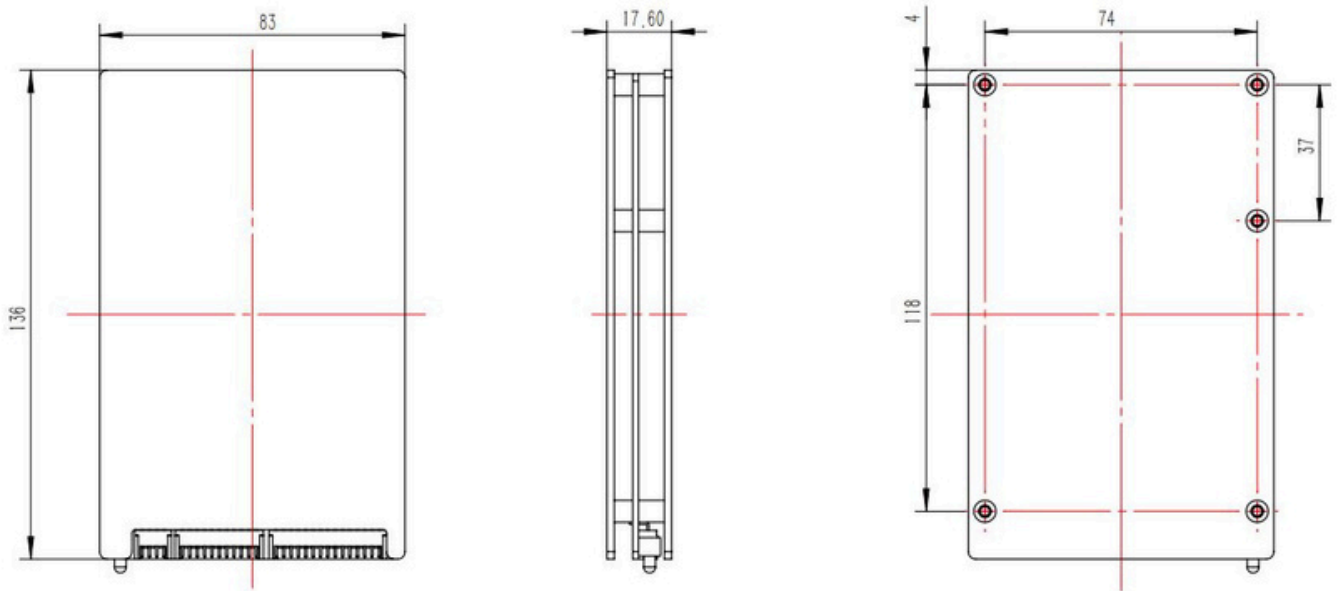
outline dimension drawing of BD6AXXS-6P and BD6AXXS-8P series BMS
